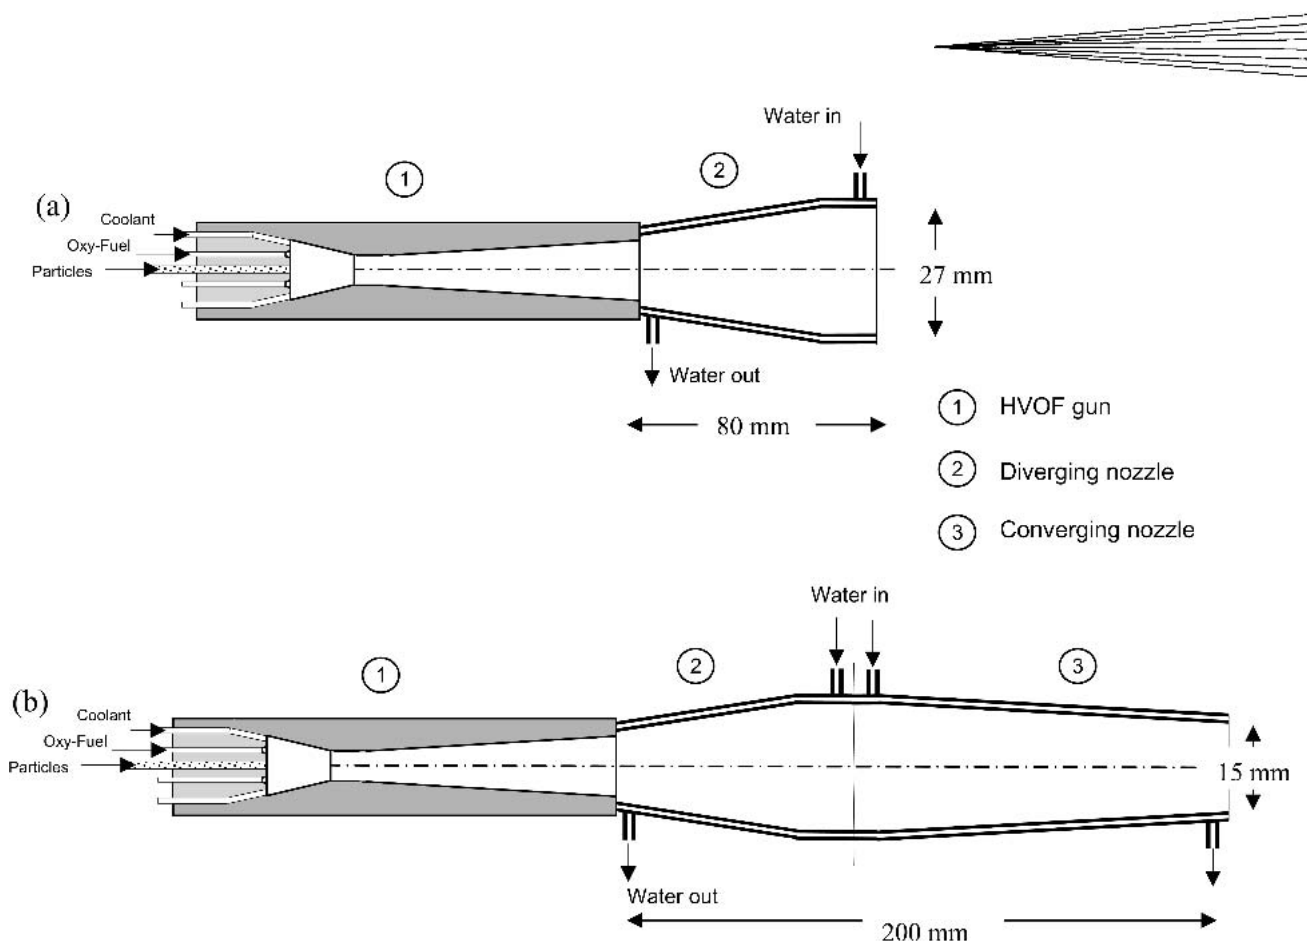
Attachment configurations. (a) Diverging. (b) Diverging-converging
